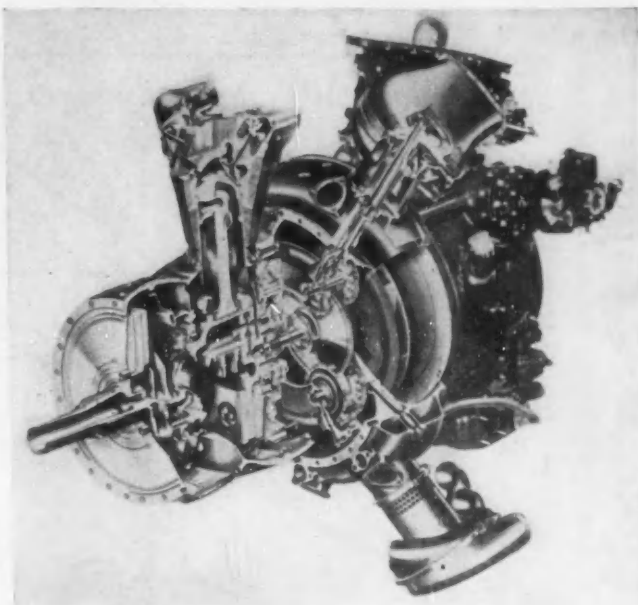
Power drive system of Wright Turbocyclone 18 engine
